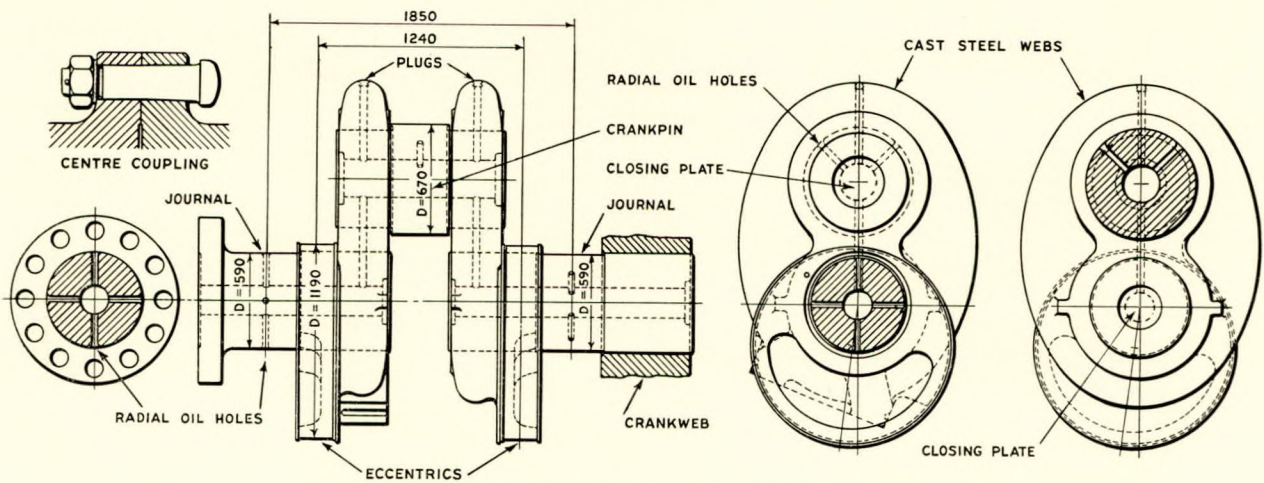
Fully-built crank in 750/2,000 P.I. engine
